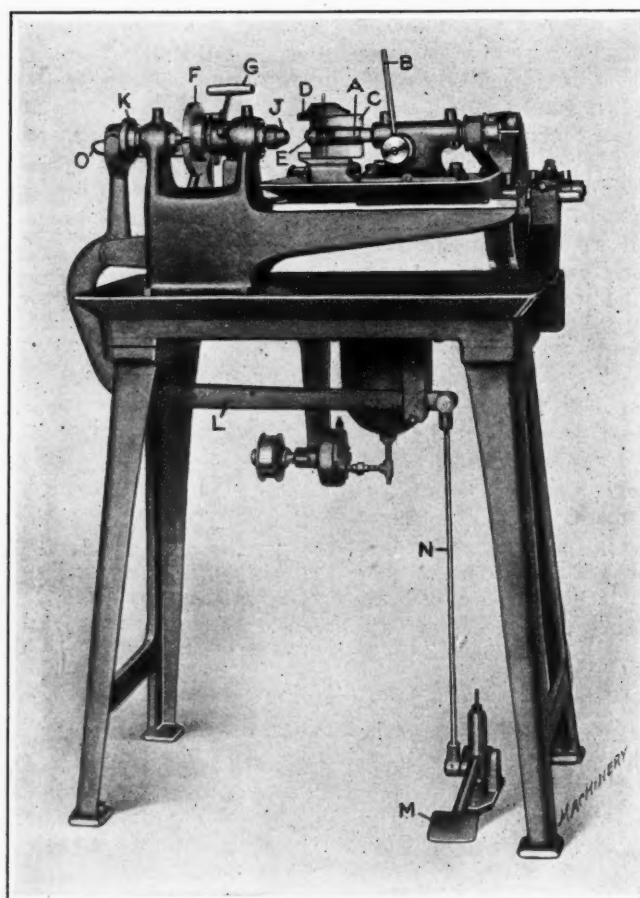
Front View of High-speed Horizontal Drilling Machine with Indexing Attachment, used in drilling Concussion Primer
